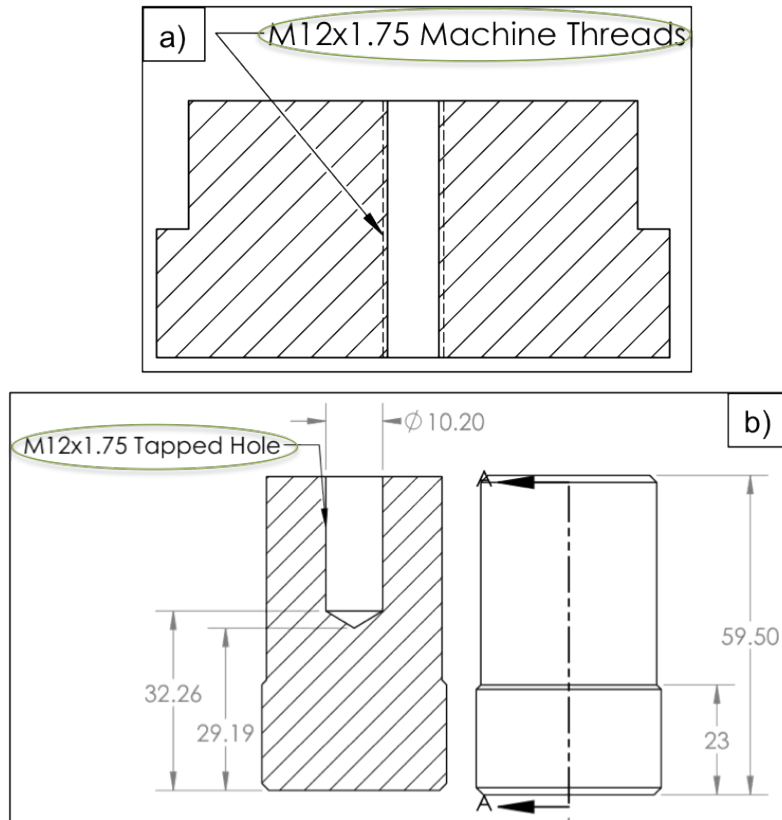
Substrate center drilled hole used for attachment to the motor. Substrates for the repair of a) 3.75-12UNJ-3A threads and b) 1.5-12UNF-3A threads (dimensions are in mm).
